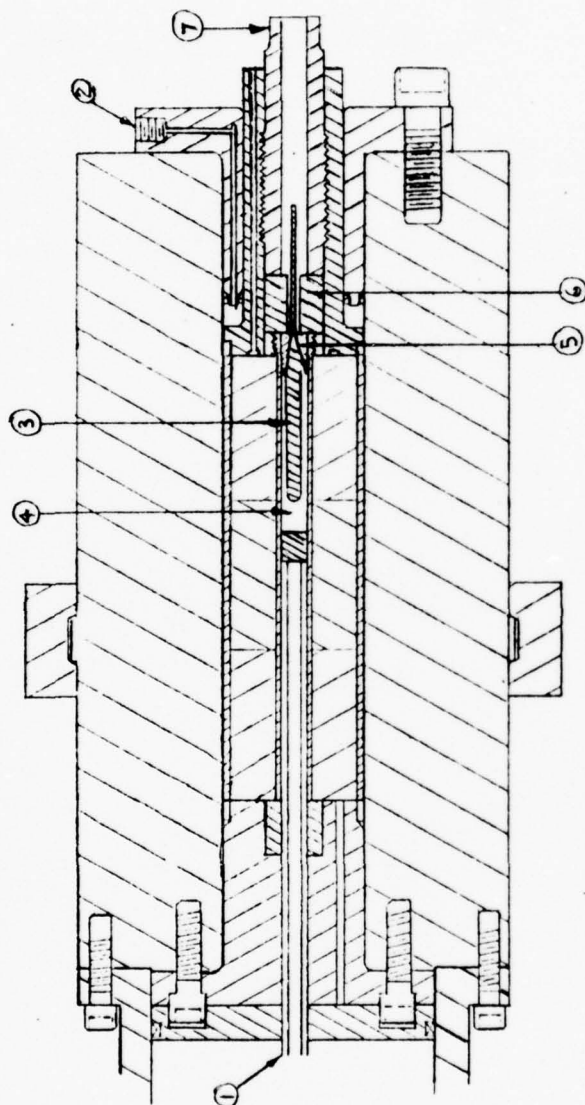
Cross sectional drawing of high pressure extrusion cylinder. (1) Die stem (2) Pressure intensifier inlet (60 KSI) (3) Billet (4) Castor oil (5) Die (6) Tungsten carbide anvil, and (7) Breech plug.
